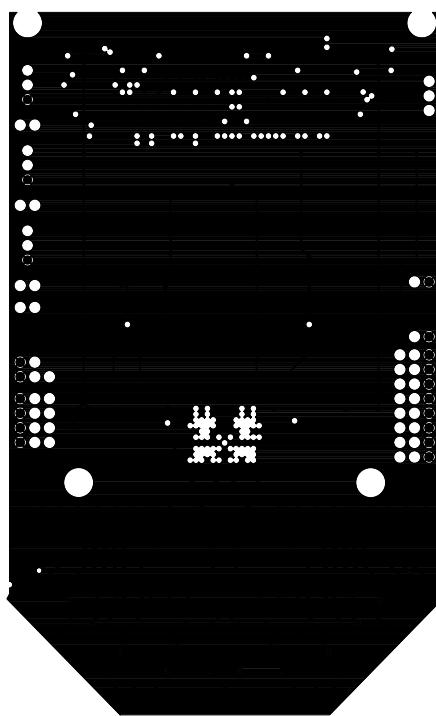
Si5110-EVB Layer 2—GND1 Plane (Daughter Card)
